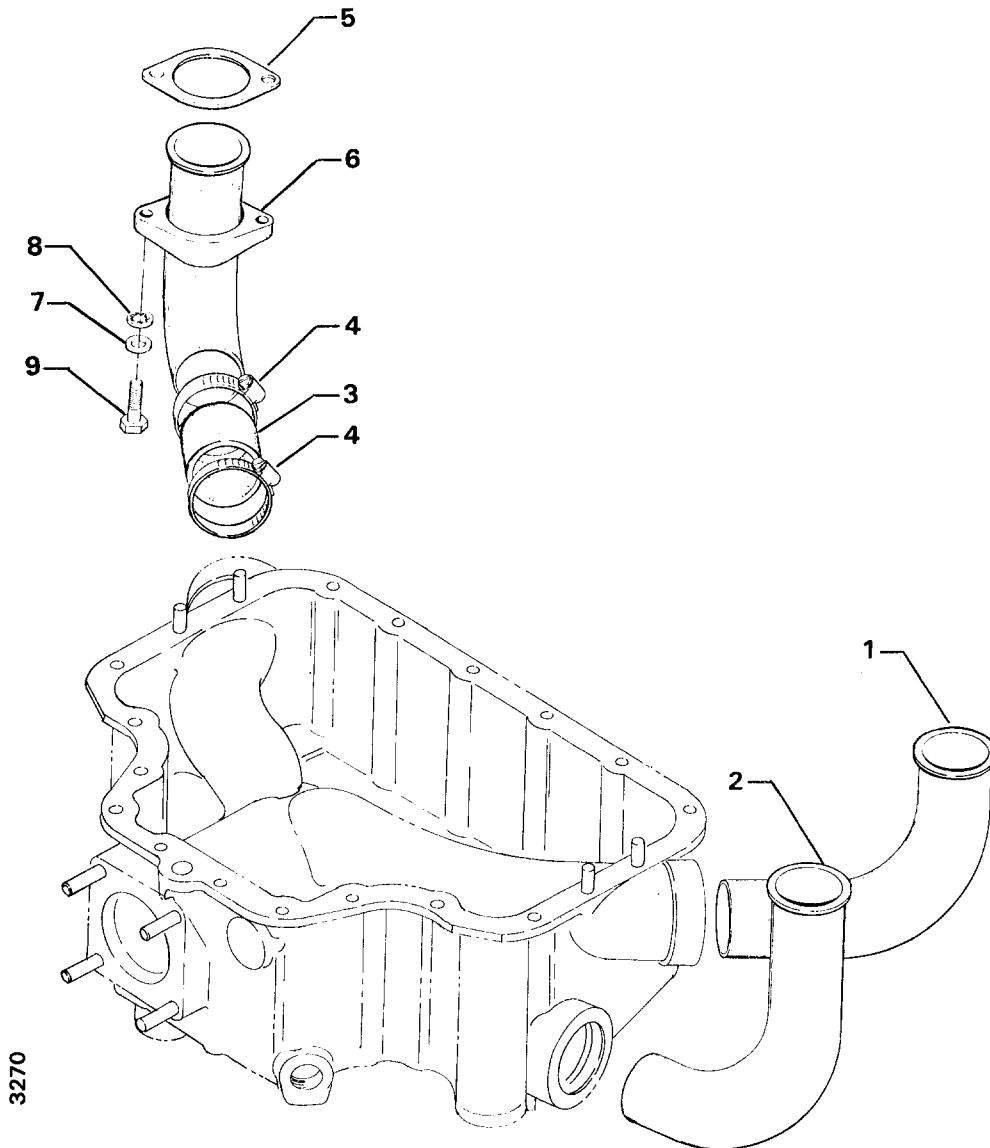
INTAKE PIPES AND ATTACHING PARTS
